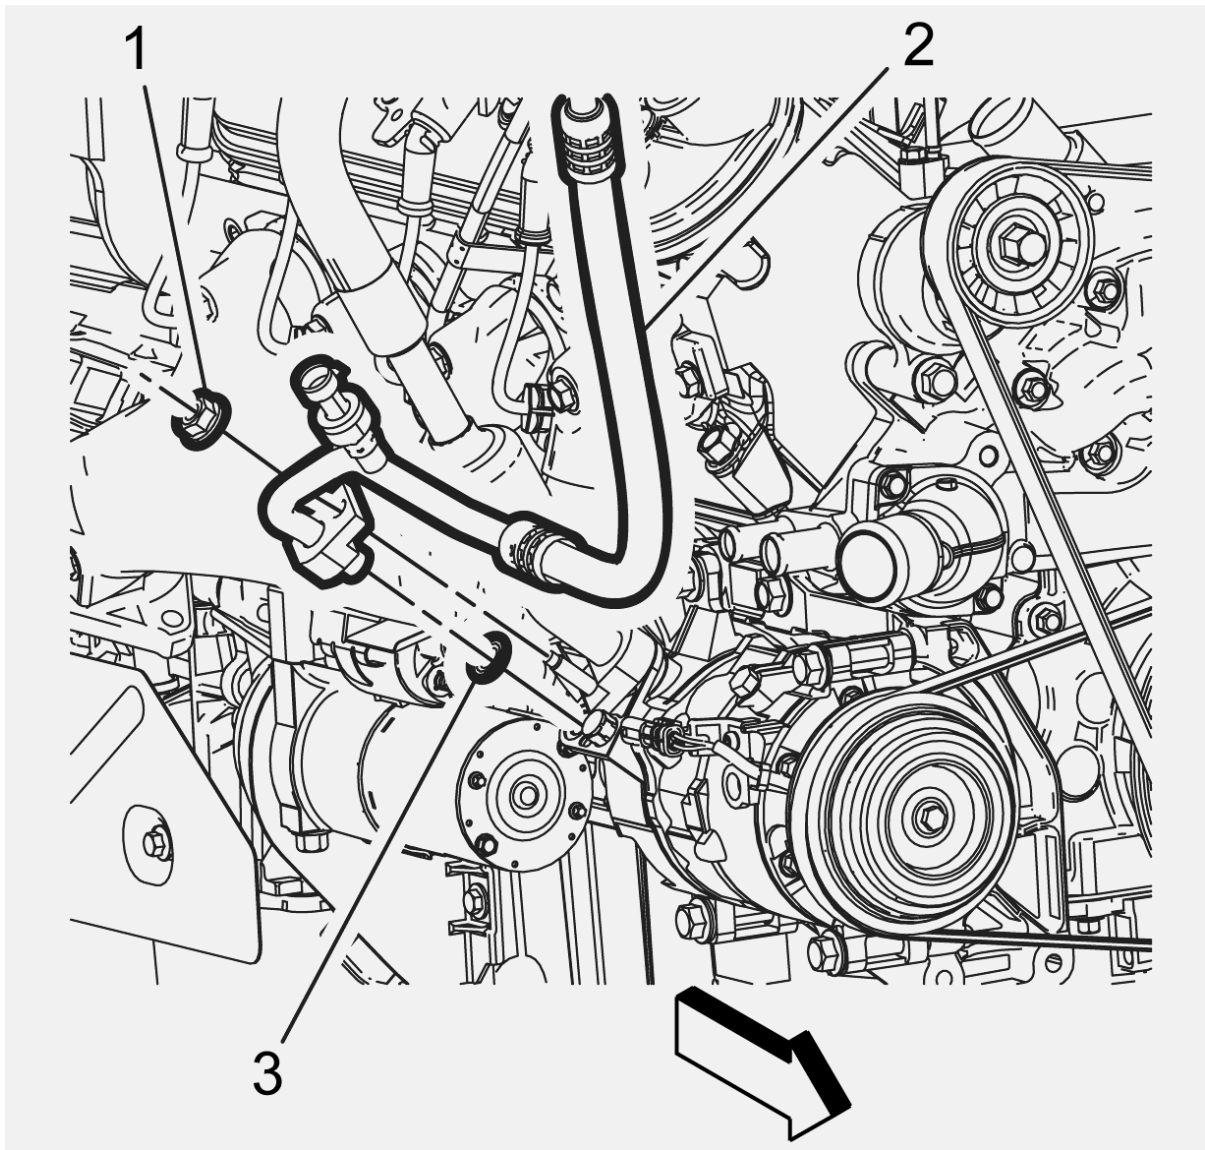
Air Conditioning Compressor Hose To Air Conditioning Compressor
